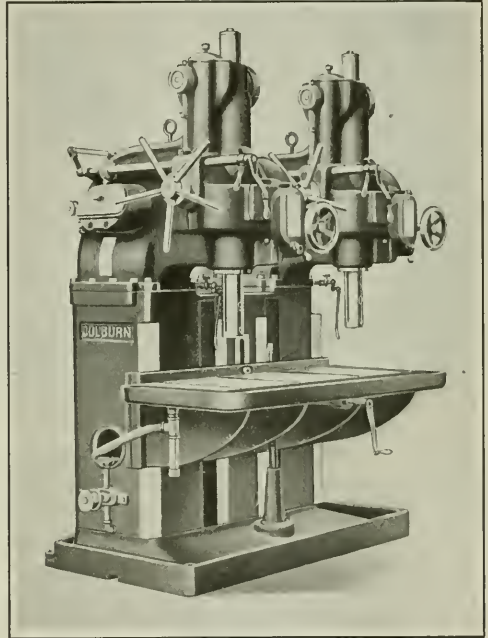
Colburn Two-spindle Drilling Machine equipped with a Plain Table
